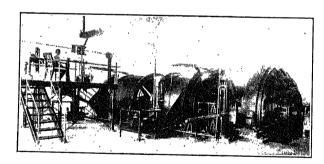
3200-Hp., 79 Rev. Per Min. D-C. Hoist Motor
